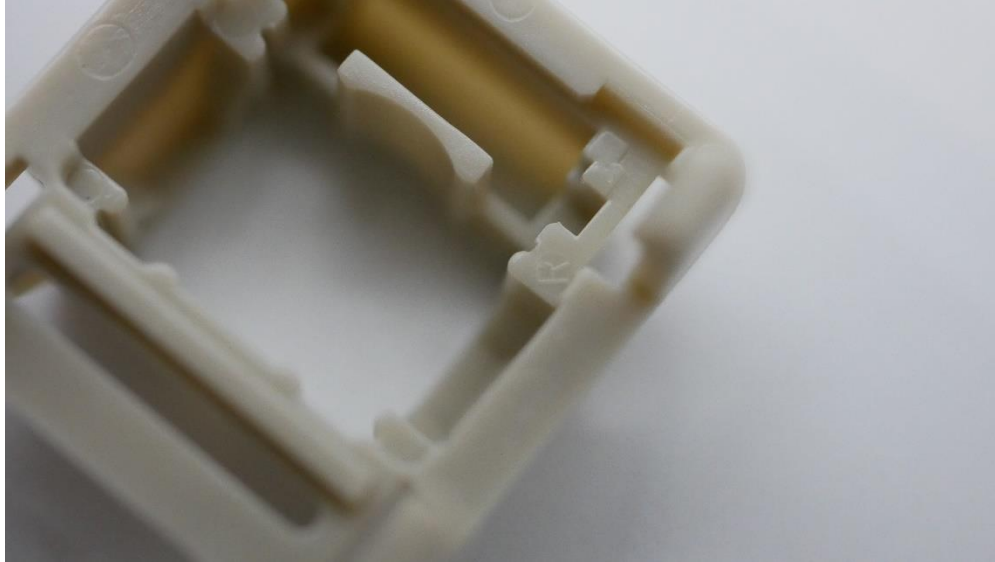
Novelkeys Cream Arc top housing single letter, angled mold marking next to the upper right hand bottom housing attachment pin.
